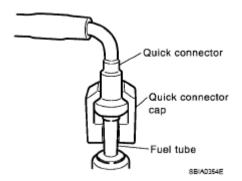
Identifying Quick Connector Cap On Quick Connector Joint
